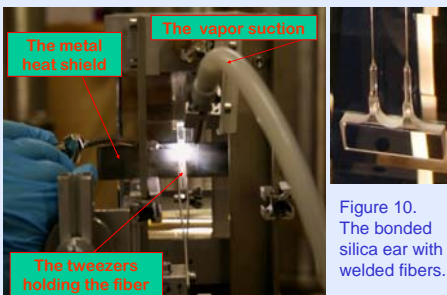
The test welding of the fully monolithic silica suspension.
